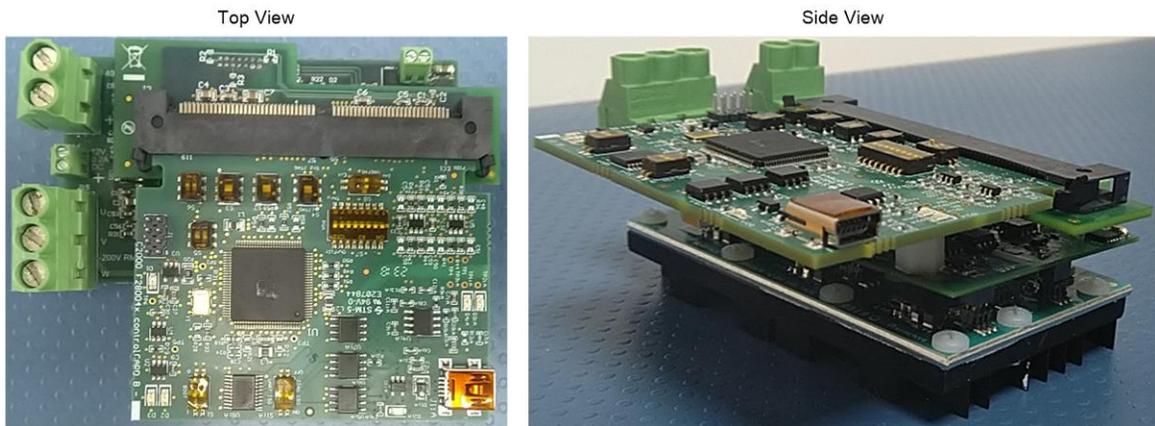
shows the top and side views of the assembled TIDA-010059 design boards.
